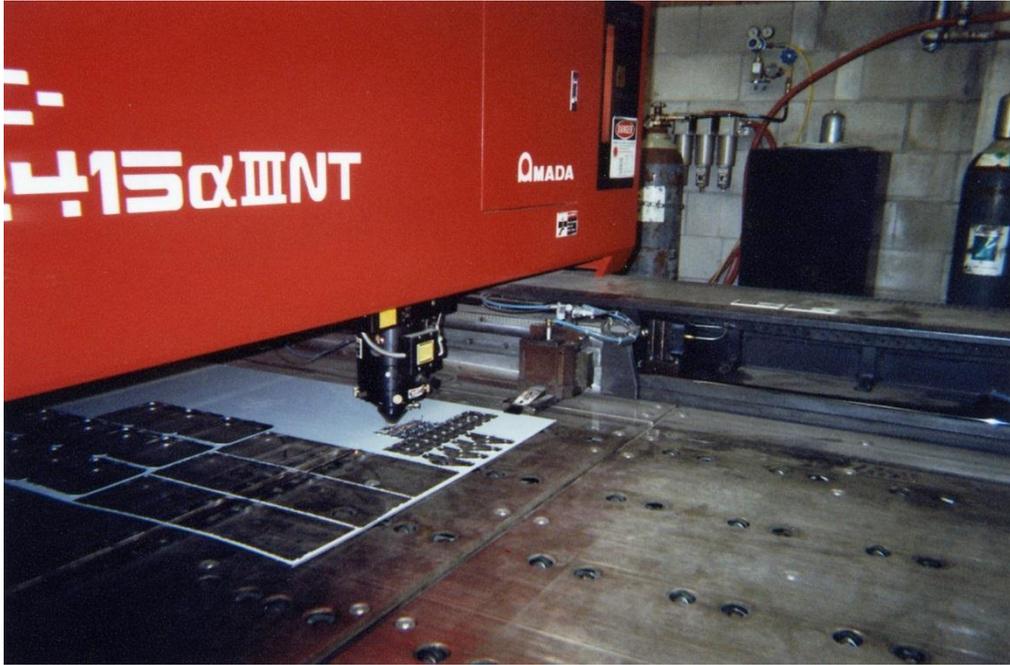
Close up, showing a sheet of stainless steel being cut for components.
